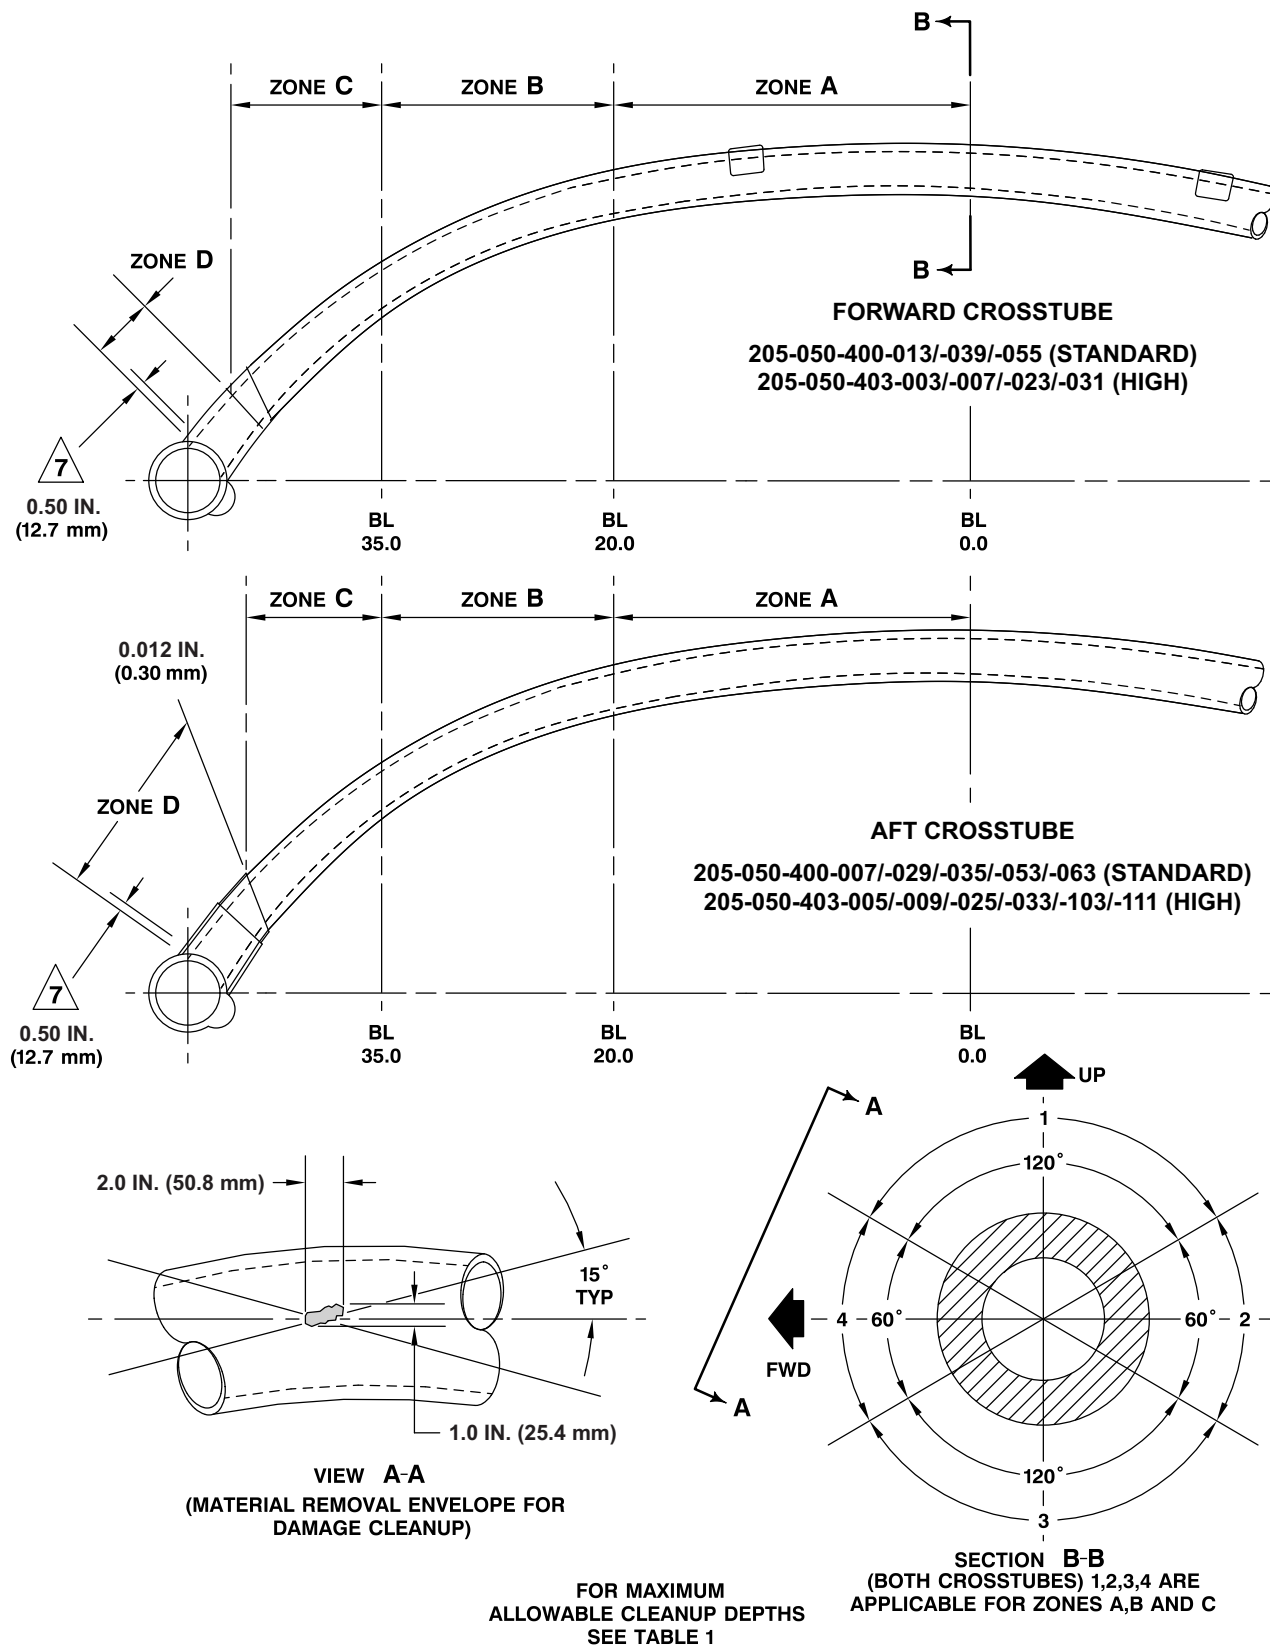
Landing Gear Assembly and Attaching Parts — Damage Limits (Sheet 5 of 9)
